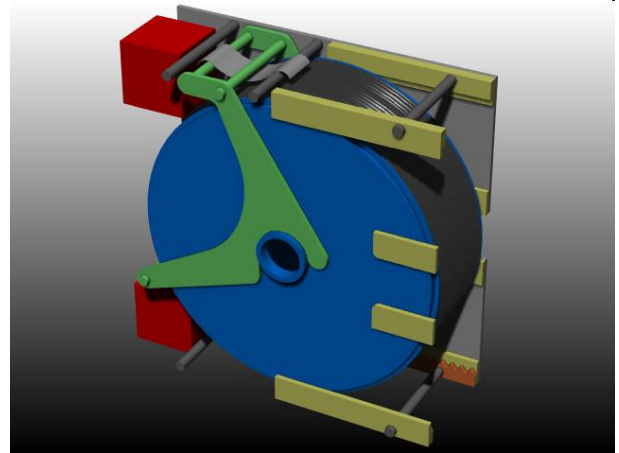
A CAD rendering of the tether ejector mechanism. A spring loaded mechanism deploys the tether spool. During deployment the spool is both translated and rotated, thereby ensuring that the tether wire is not stressed unnecessary. By courtesy of Tøpholm.[13].
